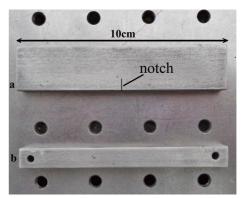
Specimen for test: (a) Before loading process (with a notch on specimen); (b) final specimen with invisible crack.
